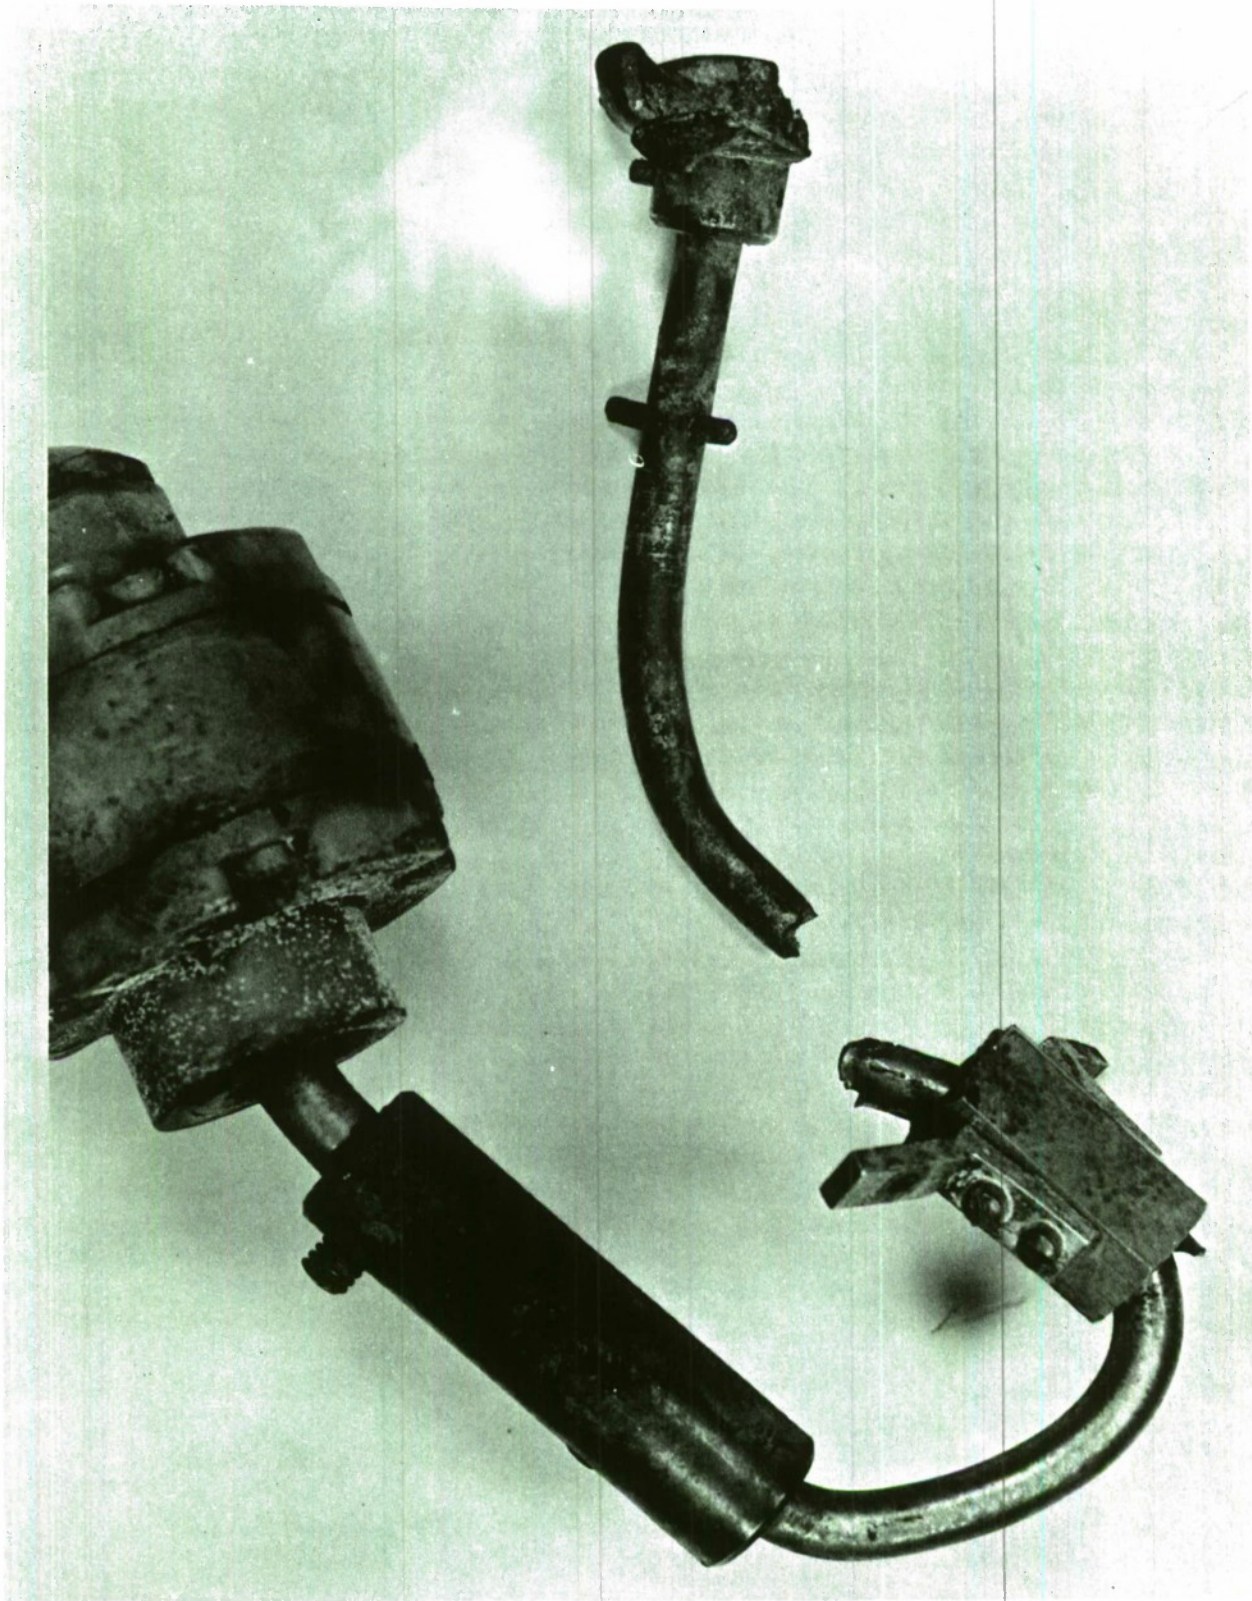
In-line mixer shaft following explosion. Slight scoring can be seen above the pin near the impeller.
